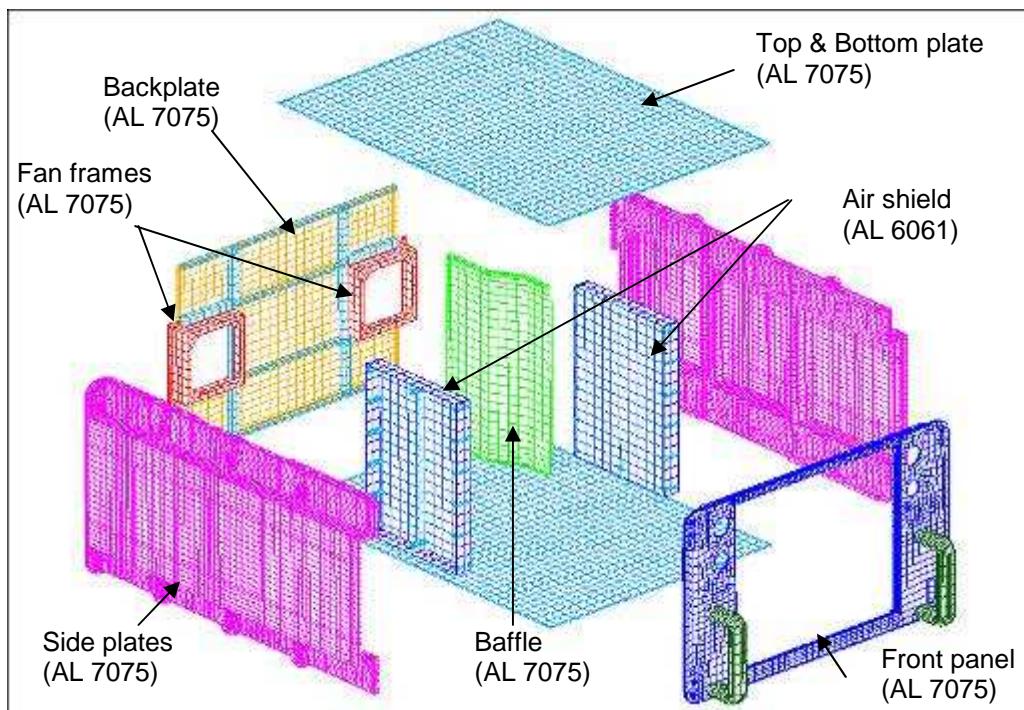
LOCKER FE MODEL (EXPLODING VIEW)
